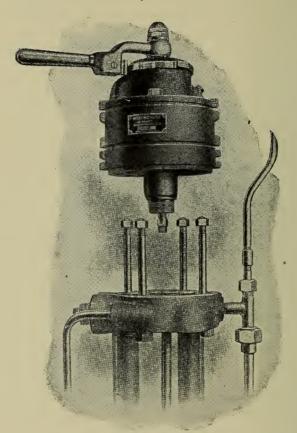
H-6 Automatic Brake Valve Removed from its Pipe Bracket.
